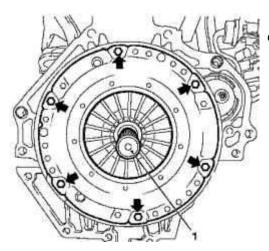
Centering hard plate and clutch plate: 1 - device KM-6263-30
